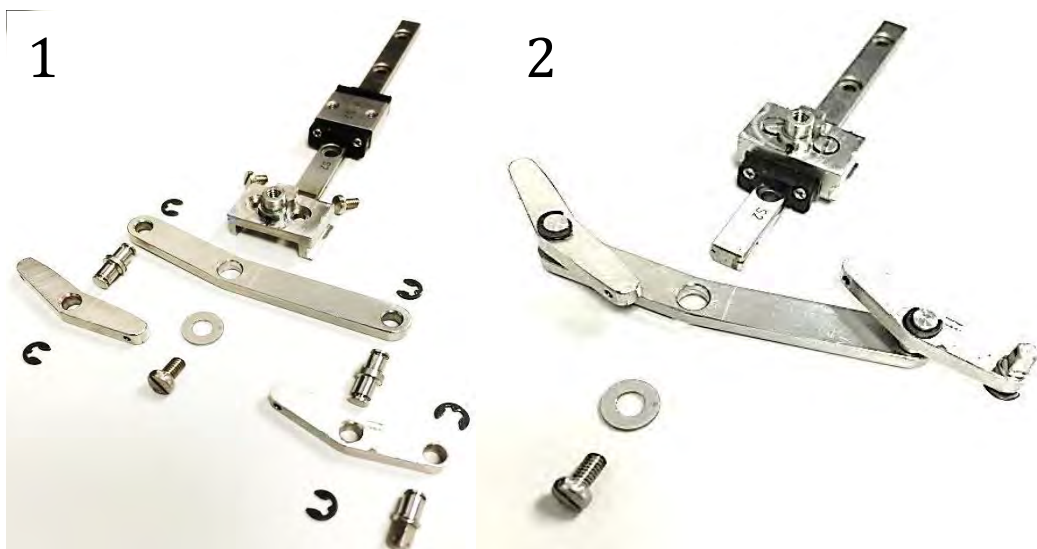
Assembly stages of the differential seesaw mechanism (Part 1)
